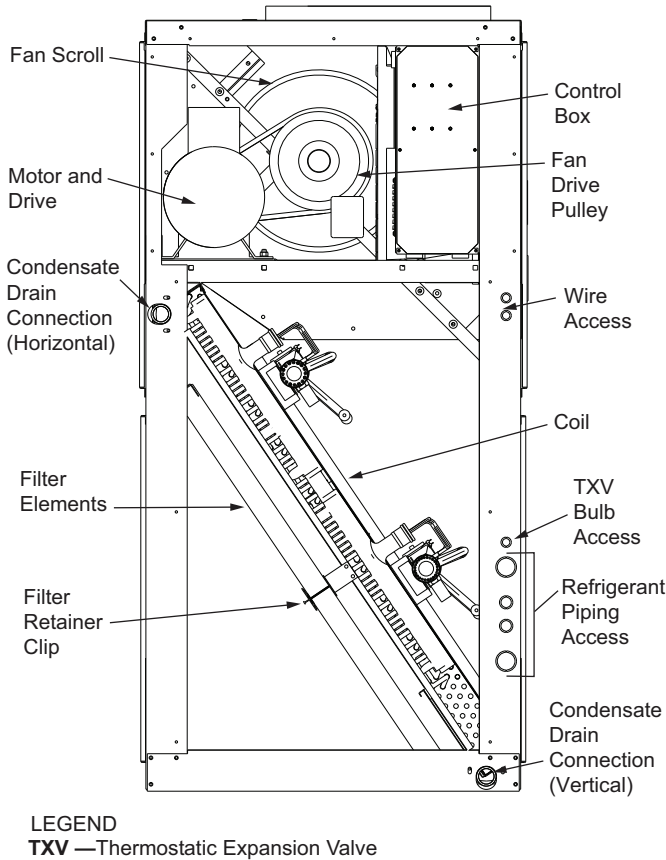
Wiring and Service Access (Side Panel Removed)
